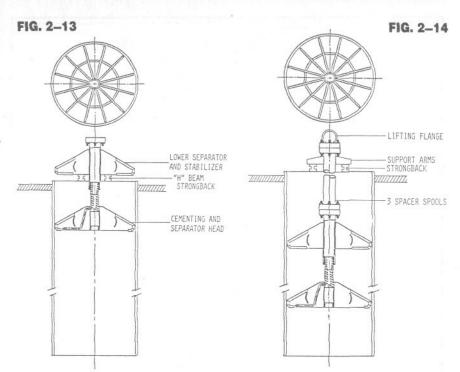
The lower separator and stabilizer assembled to the cementing head are hung off the top of the platform. (*Courtesy Gray Tool Co.*)
